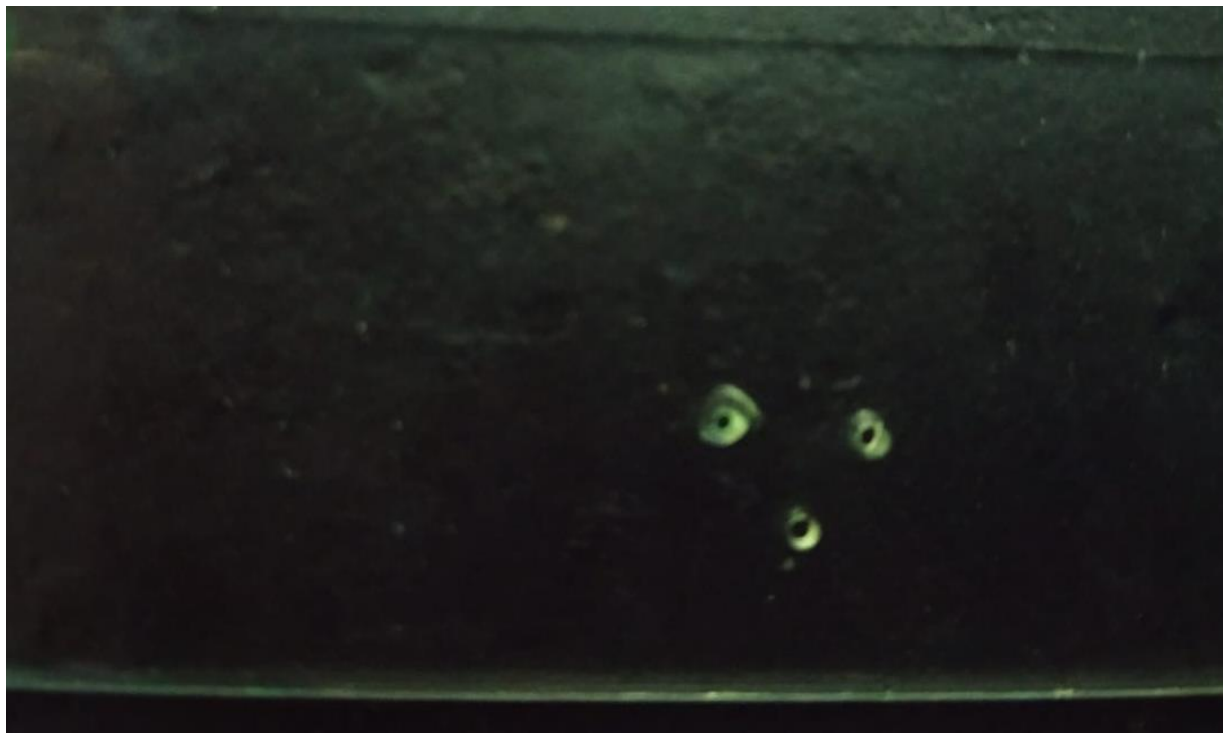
Holes machined on a glass workpiece of 2 mm thickness at a feed rate of 0.4 mm/min
